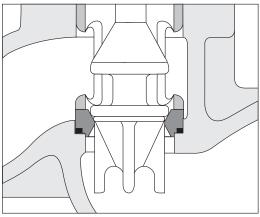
Seat-guiding design. (Courtesy of Valtek International)
